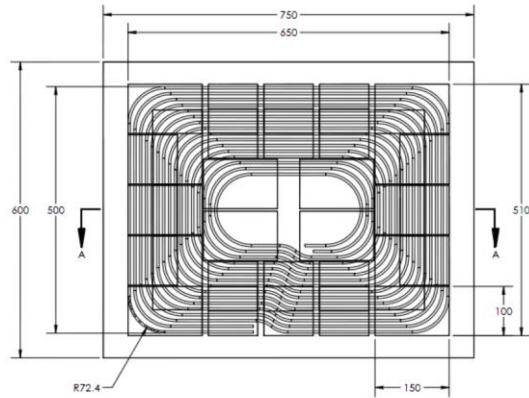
Mechanical dimensions of the Test Station Universal GA
